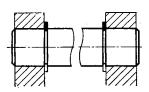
Pivot pin fixed against axial displacement by radially set retaining rings
